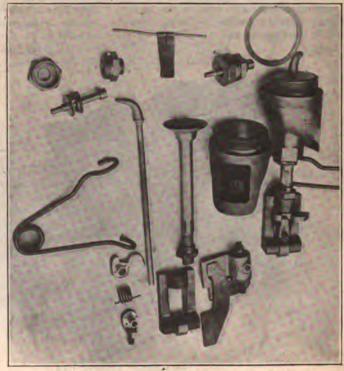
PARTS OF EXHAUST VALVE AND IGNITER.
